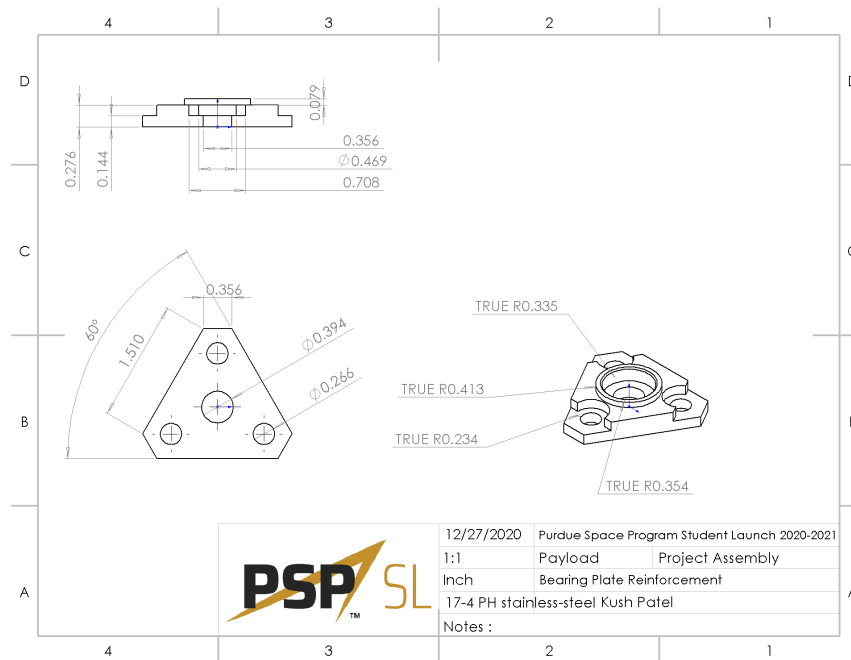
Bearing Plate Reinforcement Dimensional Drawing
